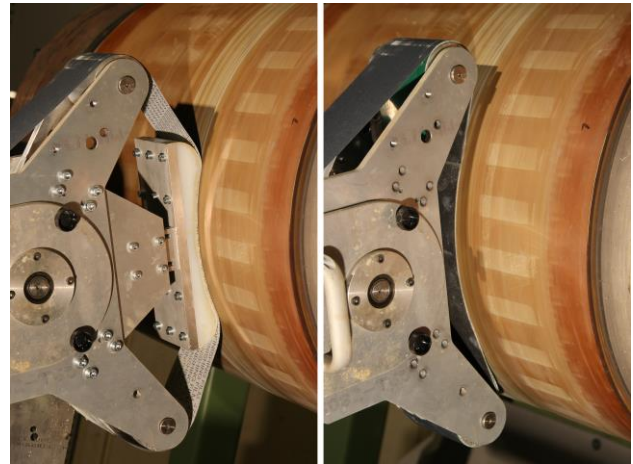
Developed grinding tool (left) and free belt grinding (right). On the test rotor surface there are marks left from grinding the initial runout error.
